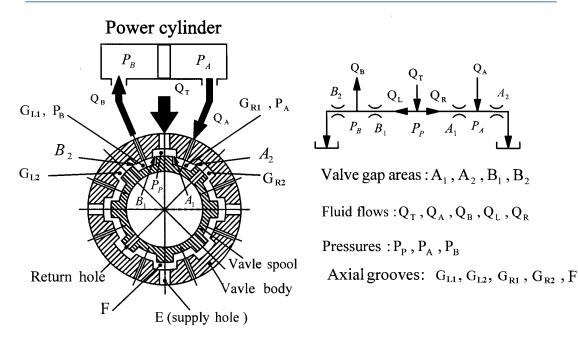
Section view of the valve body and valve spool in their assembled position as well as the valve equivalent flow paths
